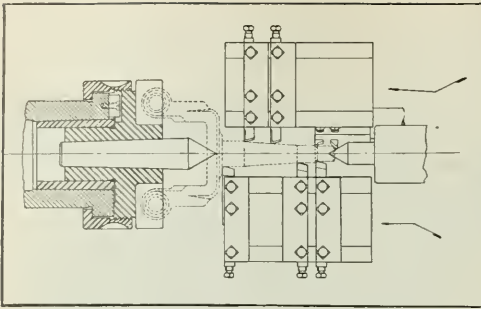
Rough-turning Automobile Steering Knuckles on a Fay Automatic Lathe
